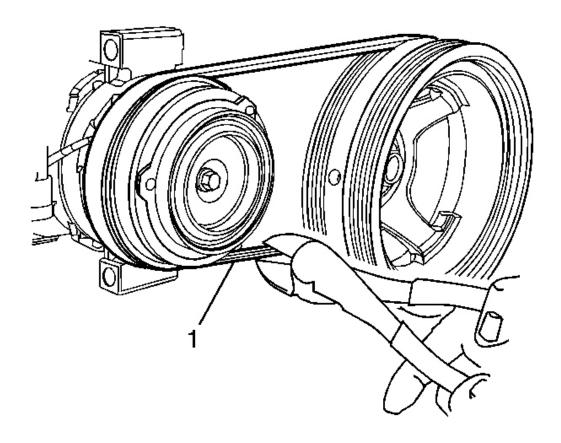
Removing Belt Courtesy of GENERAL MOTORS CORP.
